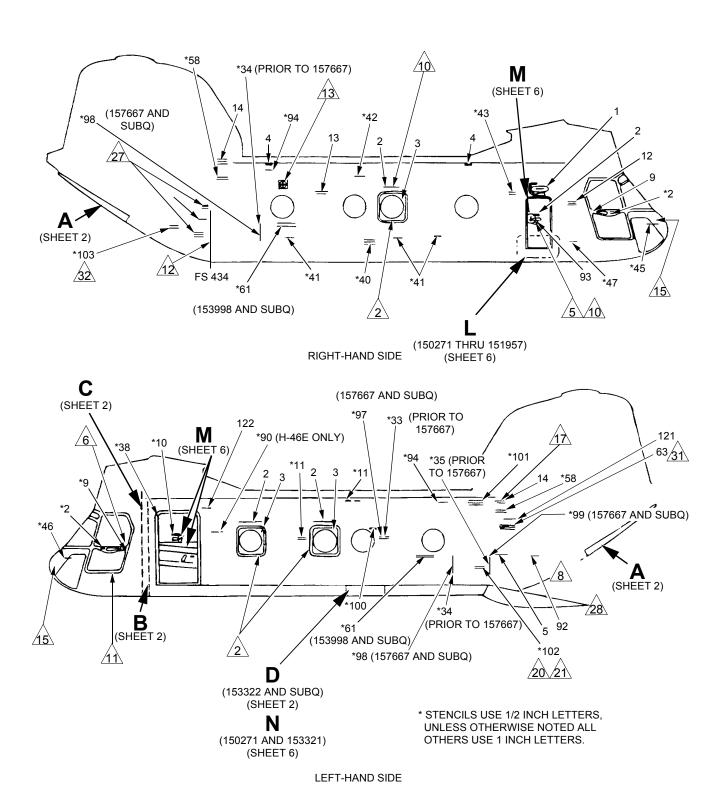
Internal Marking and Finishing (Sheet 1 of 13)
